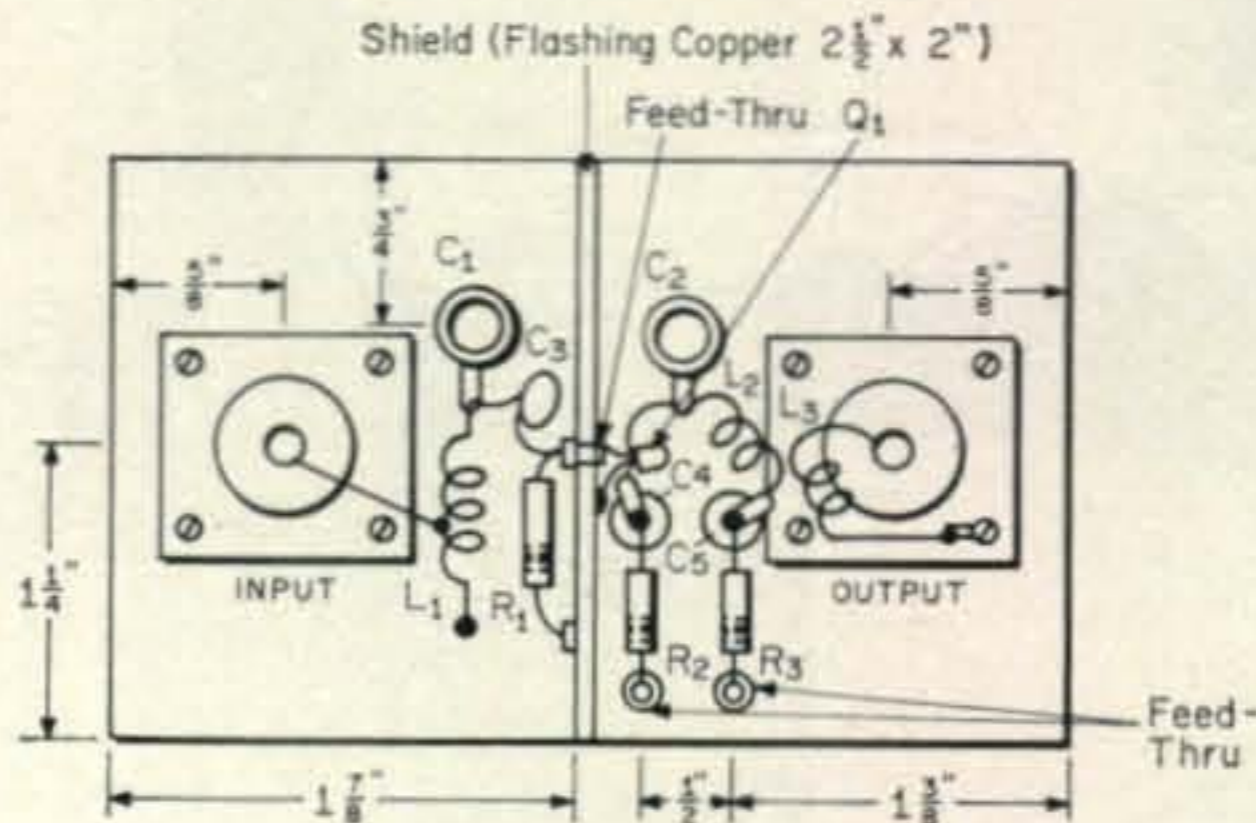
Layout of the f.e.t. two meter preamp built on a 4" x 2 1/2" copper clad board. The shield is a 2 1/2" x 2" piece of flashing copper.
